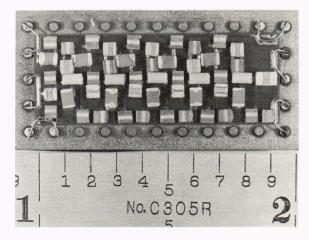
Assembly containing 52 components that were soldered in one operation.
